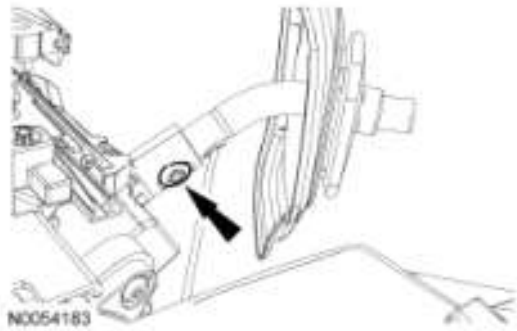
Locating Dual Converter Y-Pipe Bolts
